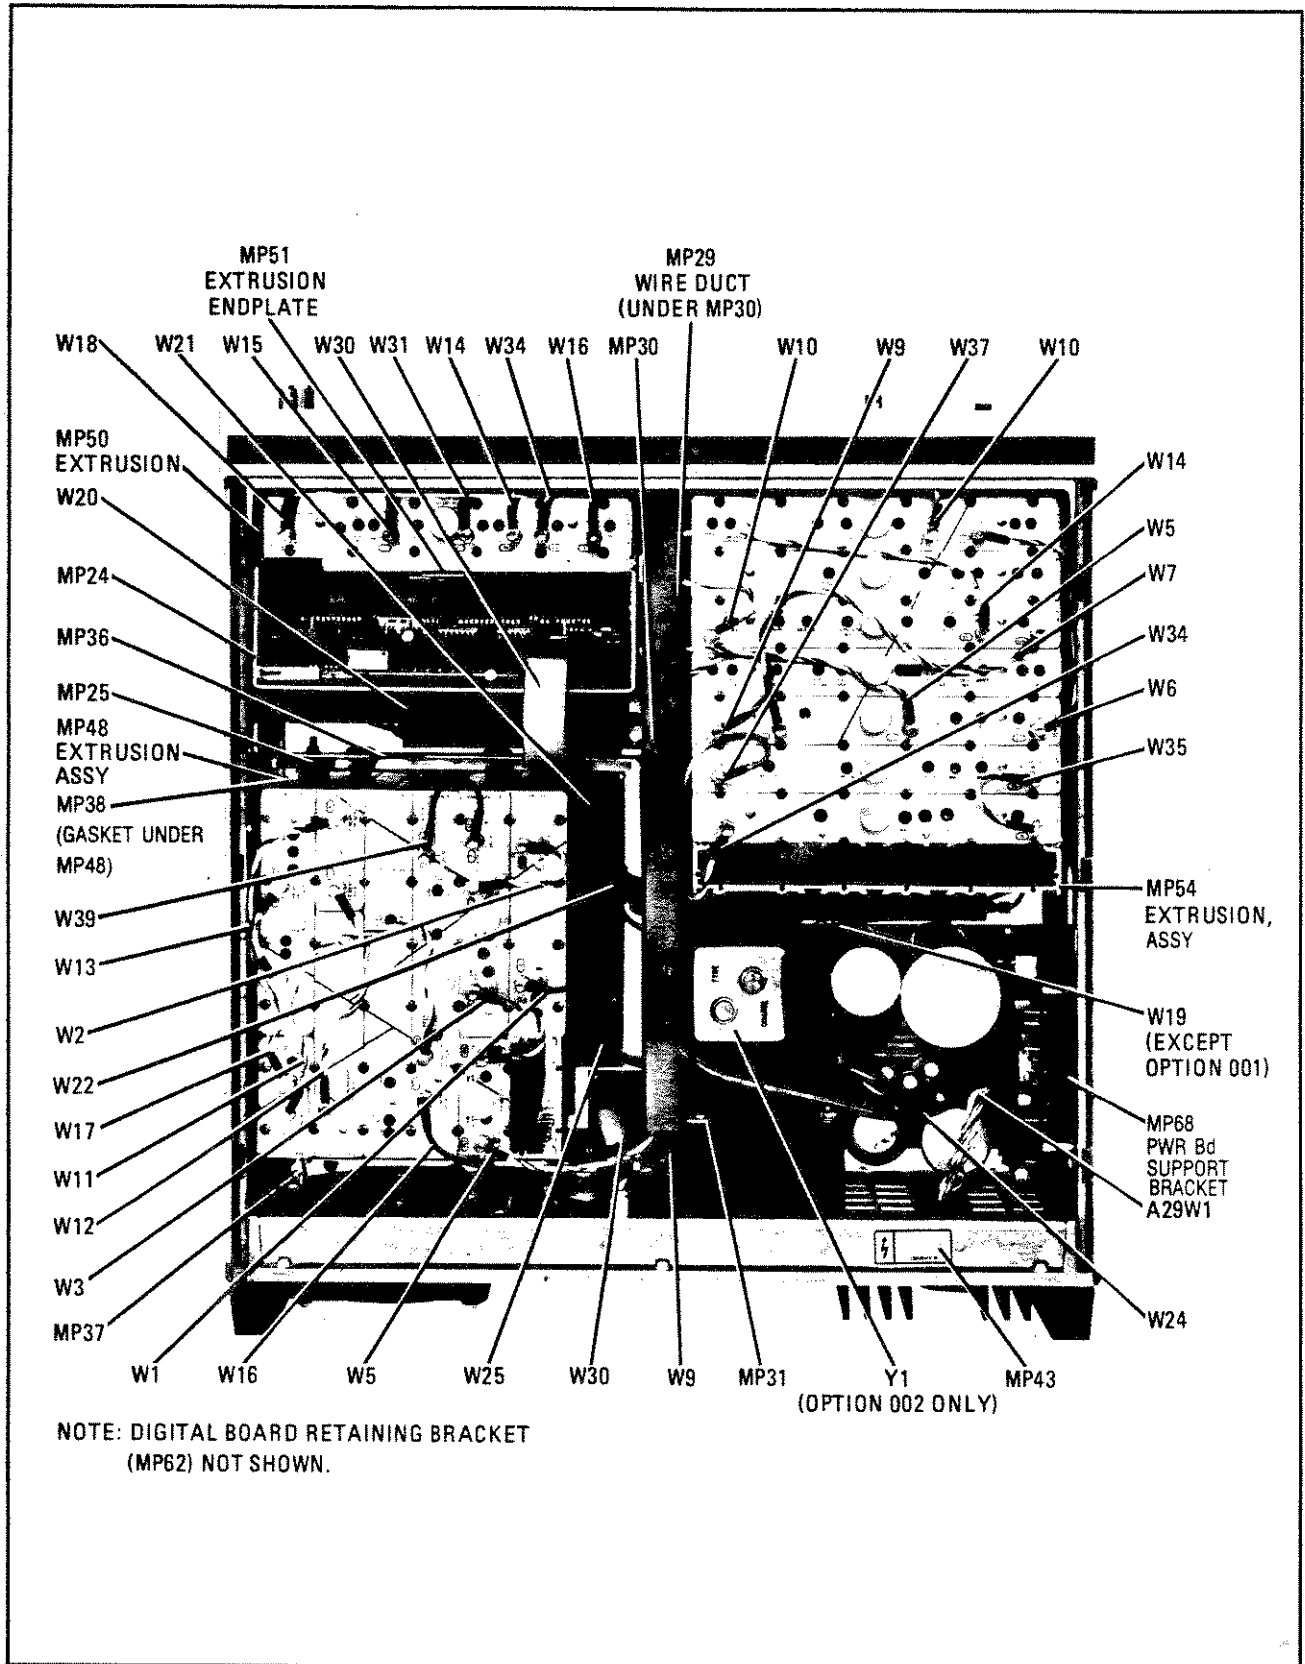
Top Chassis Parts, Mechanical Parts, and Cable Identification (P/O CHANGE 54).
